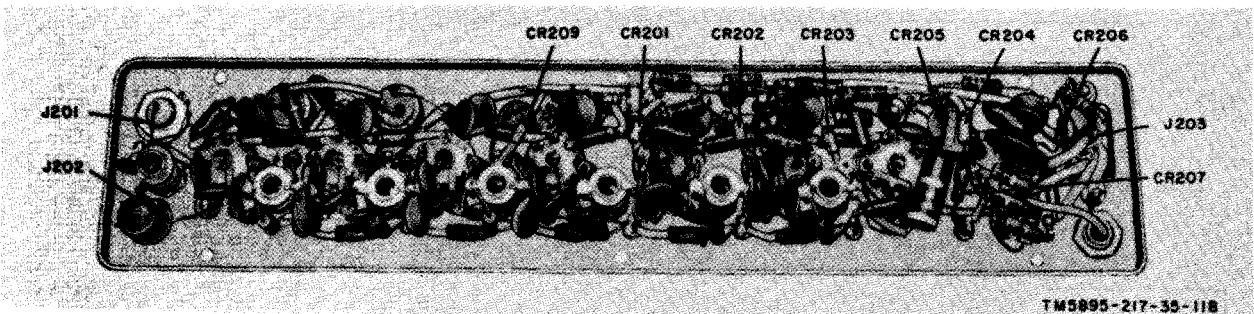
IF suppressor subchassis, bottom view, crystal and connector locations.
